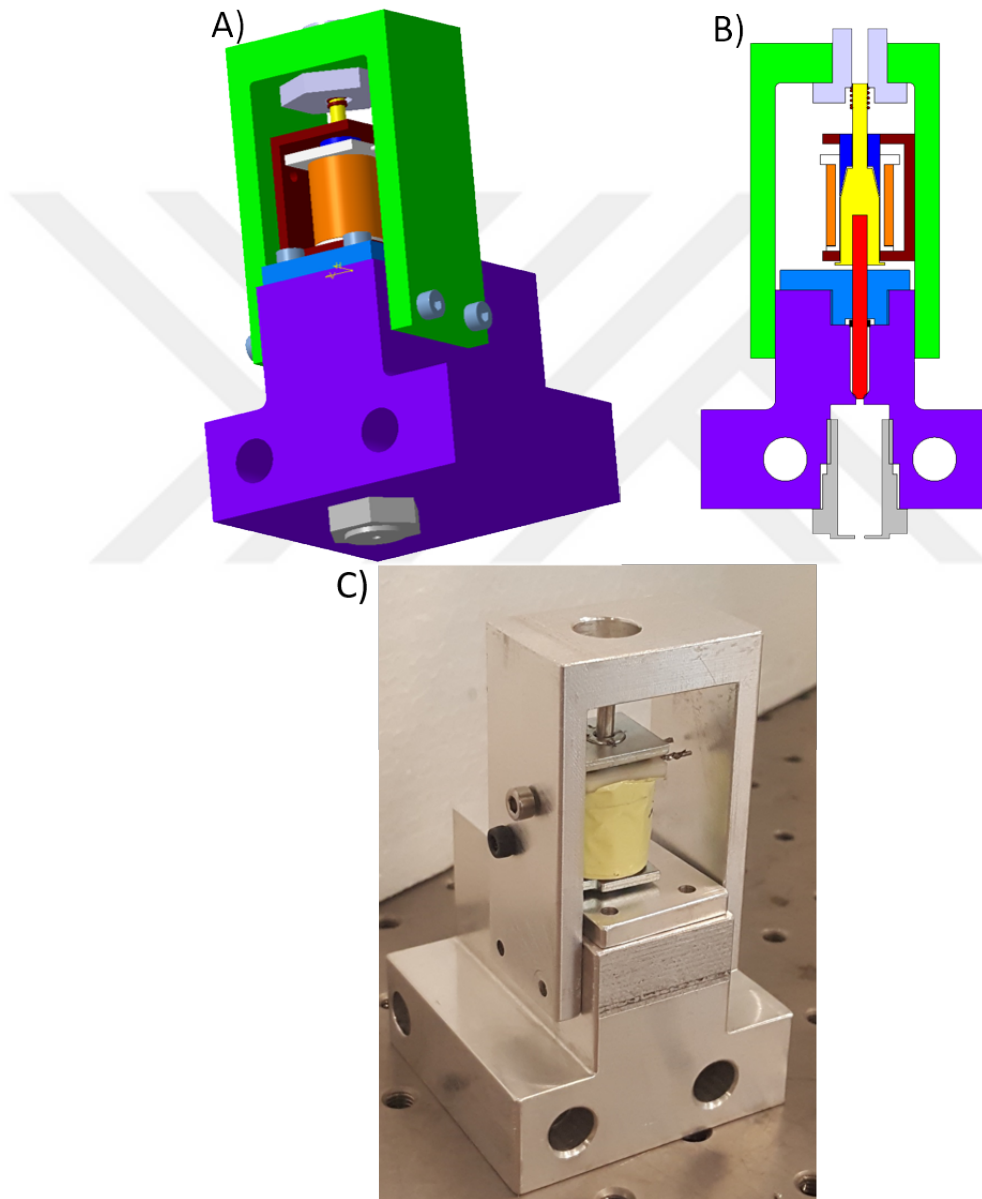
First manufactured prototype. A) Isometric view of CAD design B) Cross-section of CAD design C) Prototype manufactured from aluminum material
